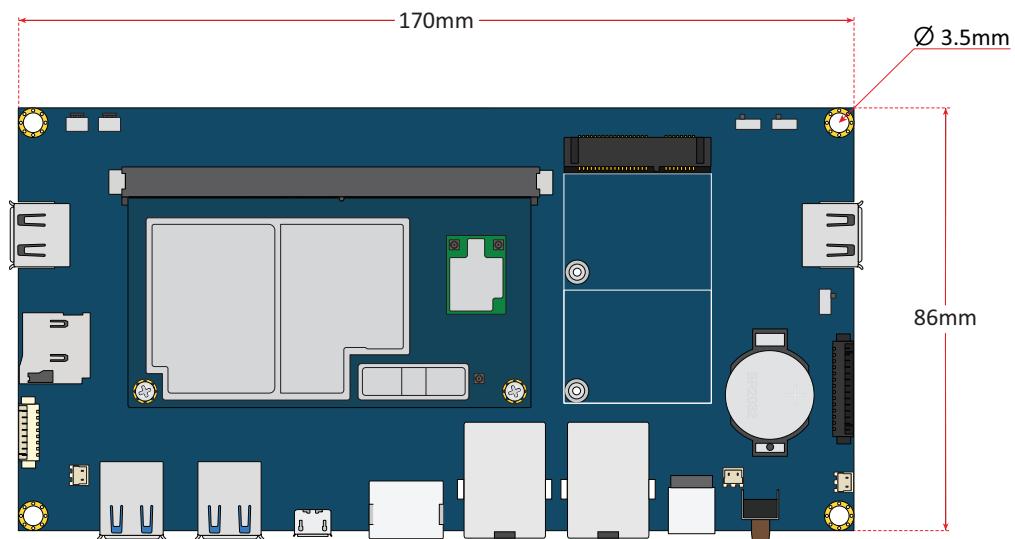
Dimensions of the SOMDB2 carrier board with VIA SOM-9X20 module installed
